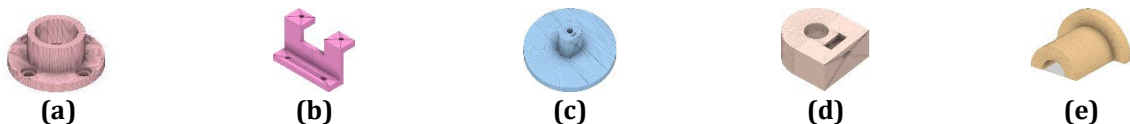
3D designs for (a) PVC camera mount joint; (b) Stepper motor mount; (c) Flat motor stage; (d) Pivot point motor stage; (e) Cable mount
